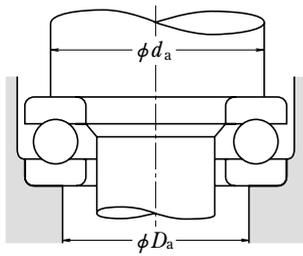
Face Supporting Diameters for Thrust Ball Bearings
